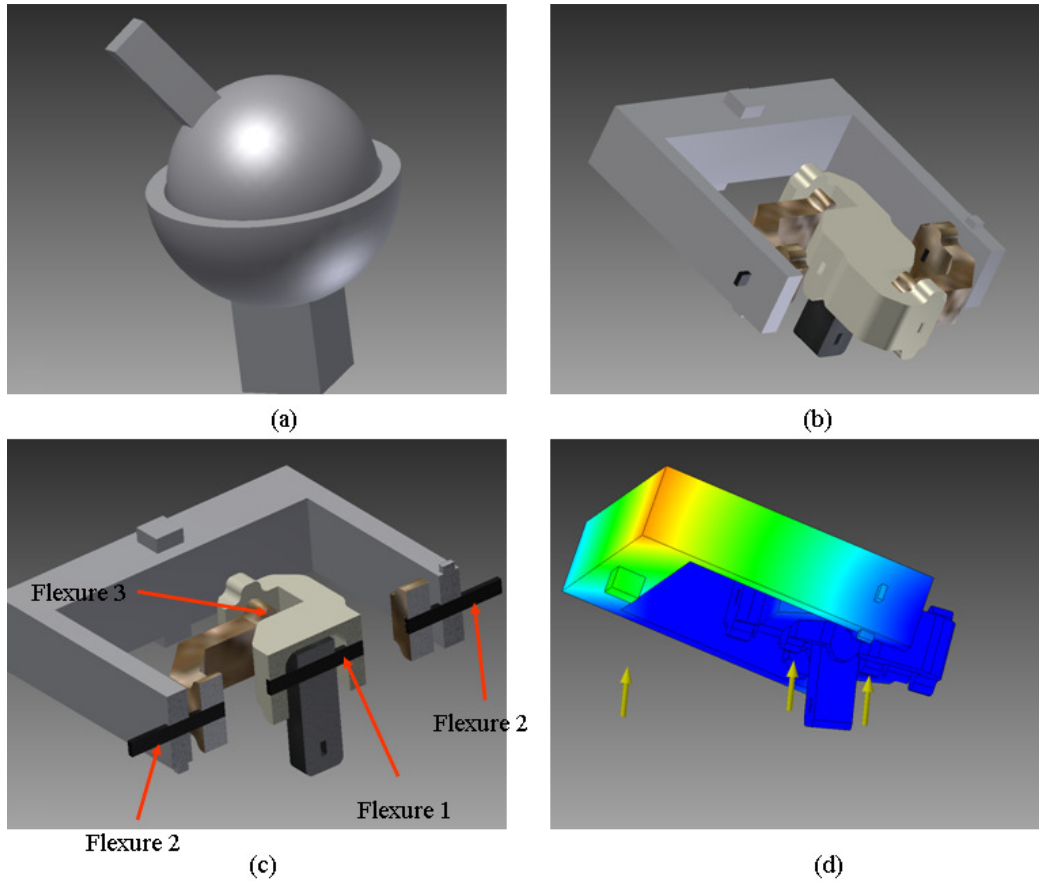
Illustrations of spherical joint configurations. (a) An ideal spherical joint comprised of a ball-and-socket combination. (b) The spherical joint used in the 6-DOF sensor comprised of flexural joints instead of bearings. (c) A half-section of the spherical joint showing the interior components. (d) A view of the modified spherical joint in (b) showing the movement of the components.
